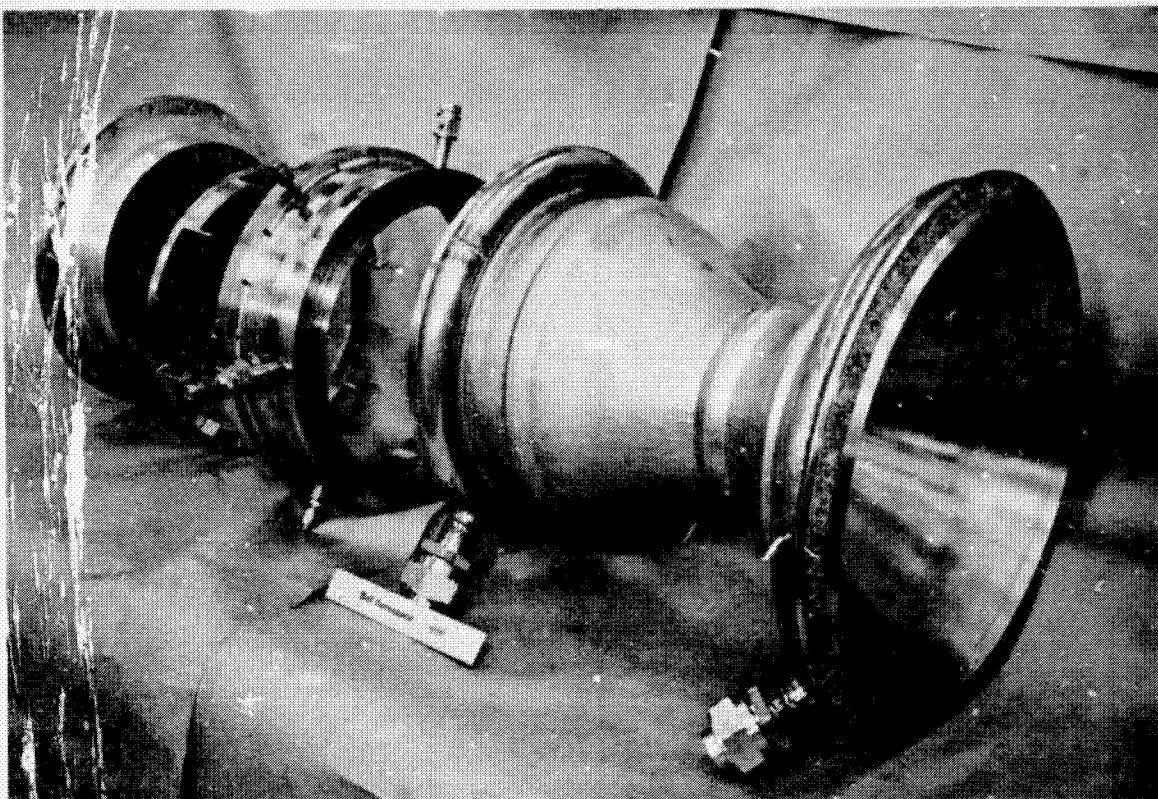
THRUST CHAMBER ASSEMBLY EXPLODED VIEW
